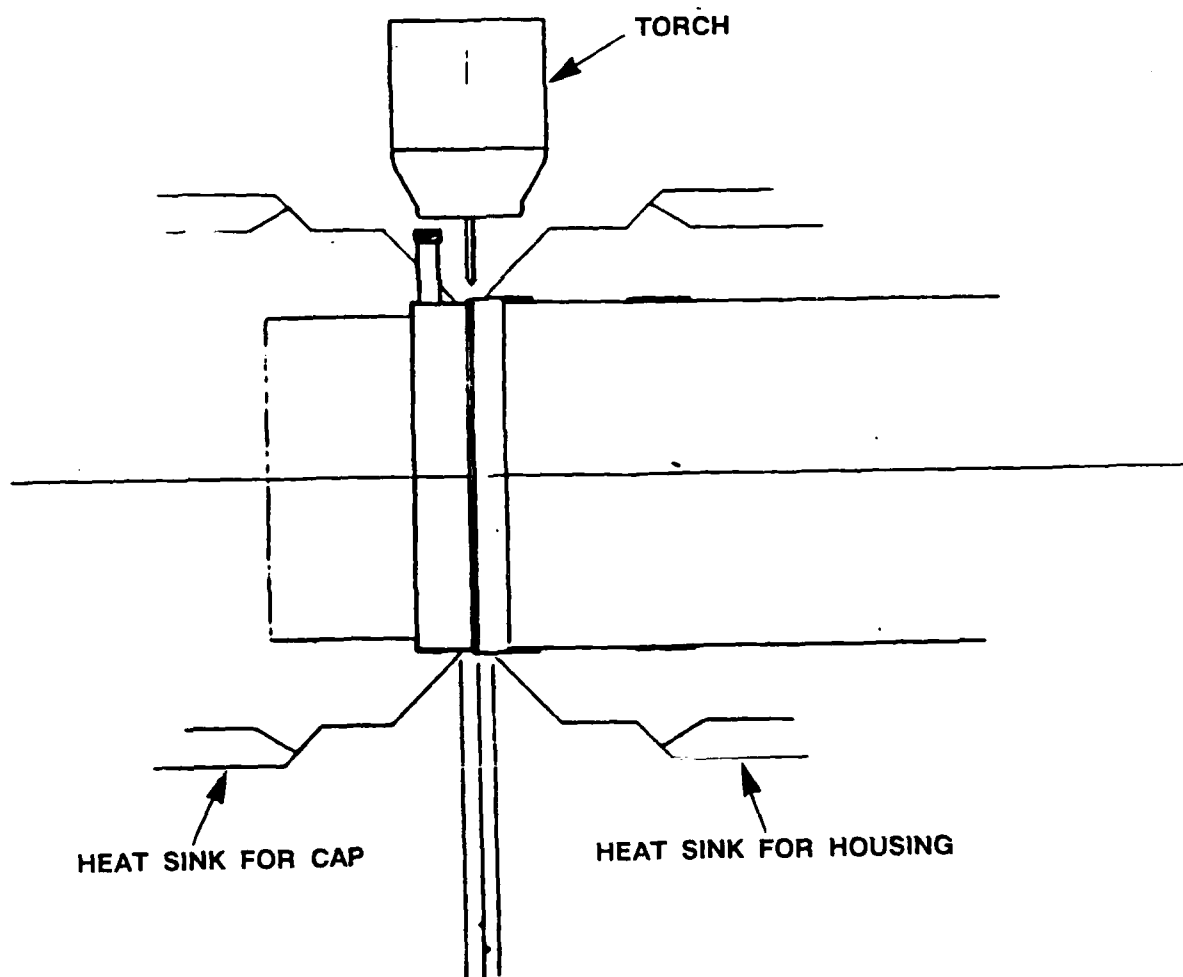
Housing Subassembly with Heat Sinks Ready for TIG Welding
